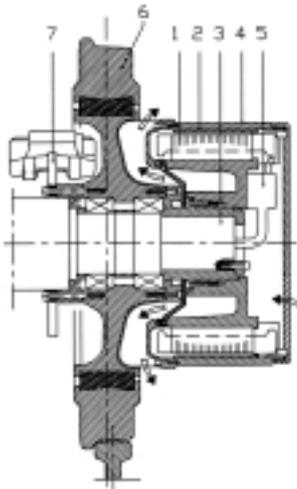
Gearless motorwheel for a street car with PMBM: 1 – stator, 2 – external rotor with PMs, 3 – axle of the wheel, 4 – rotor enclosure, 5 – terminal board, 6 – rim of the wheel 7 – brake [6]
